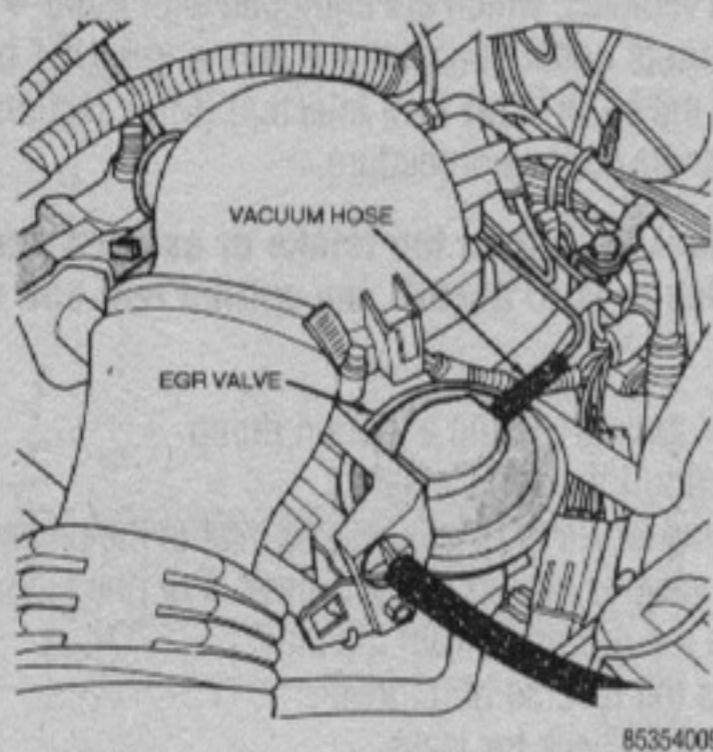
EGR valve location—1987-90 with the 2.5L engine
